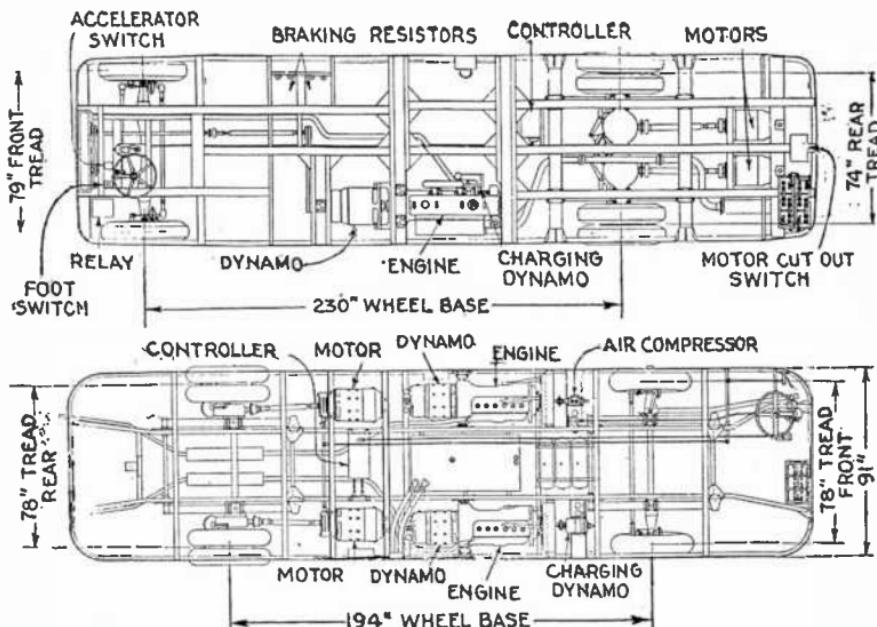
,126.—Equipment layout of 40 passenger single power plant gas electric coach.
